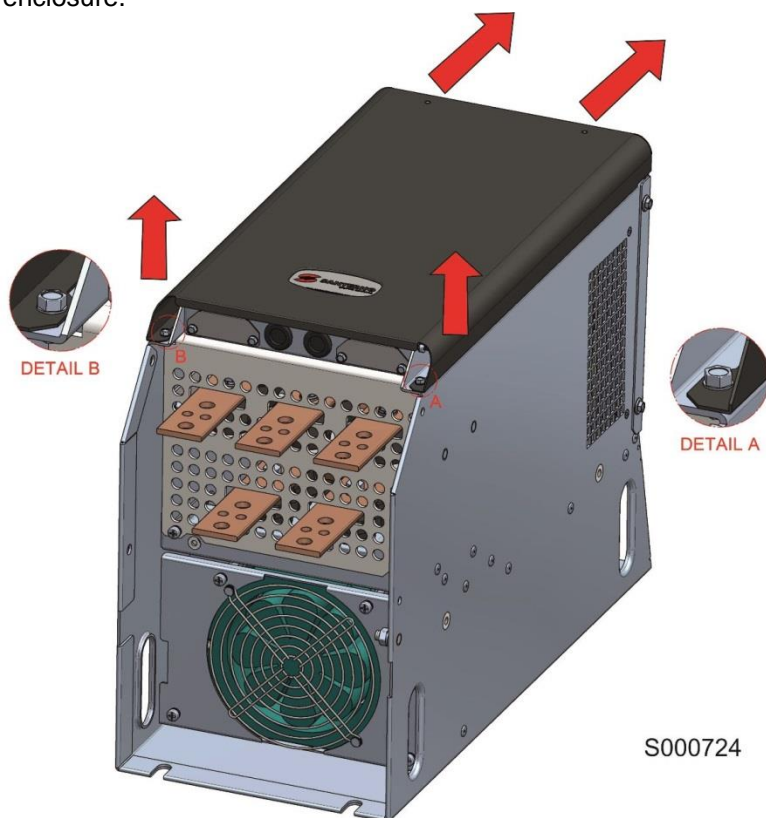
How to access ES840 board in the AC/DC UNIT 465
